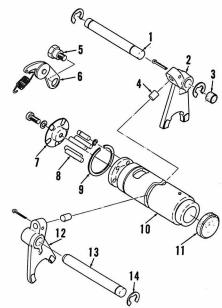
Transmission and shifter assembly should be installed in left engine case as a unit.
